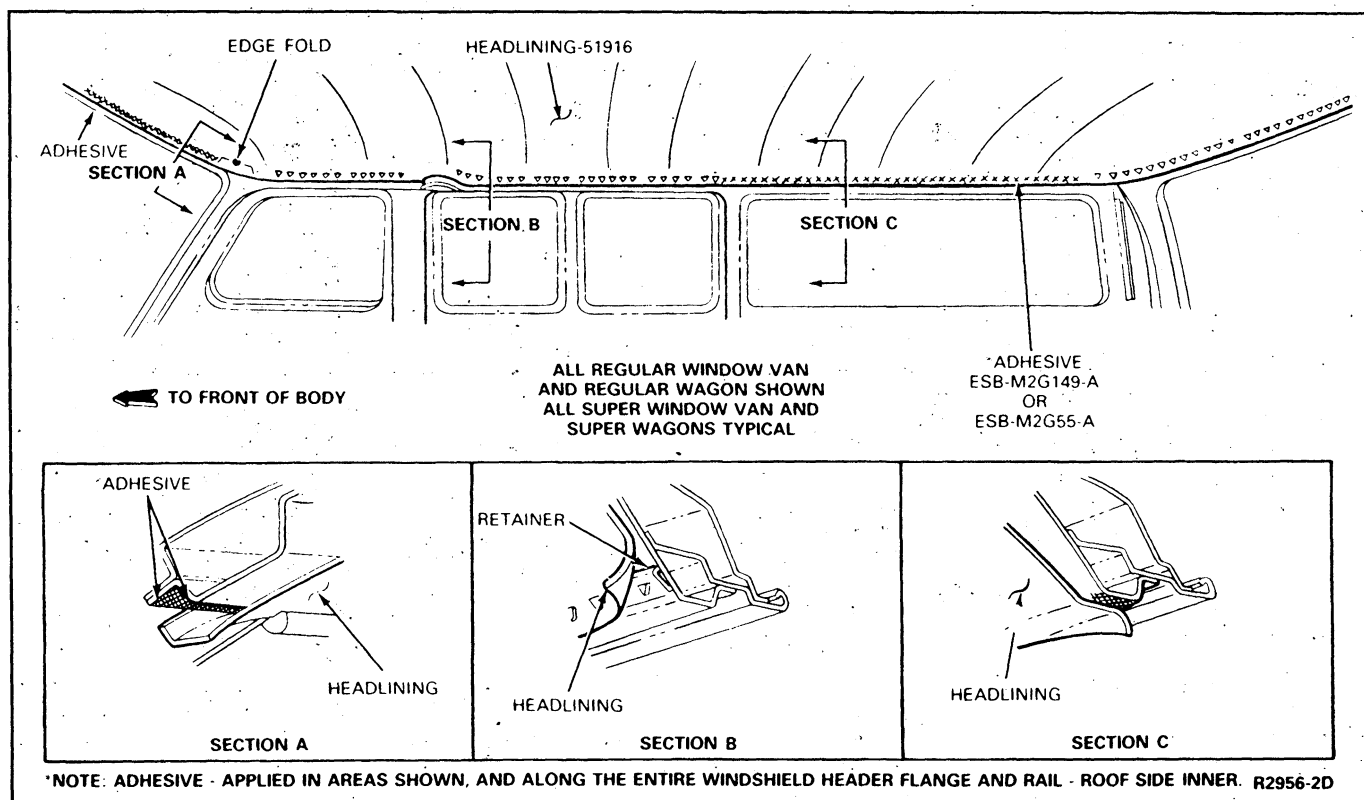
R.P.O. Headlining Assembly—E-150—E-350
